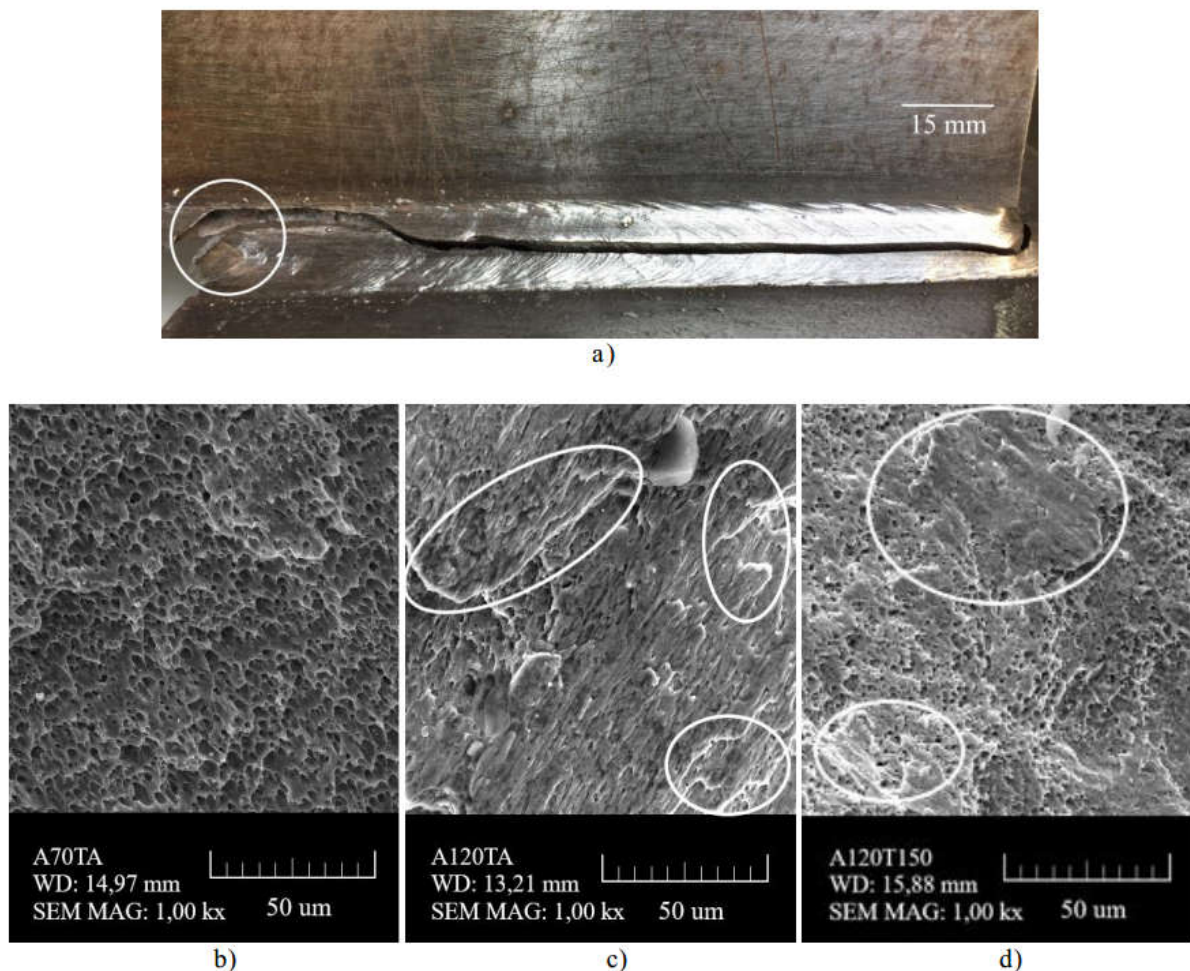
(a) Fractured weldment (A120TA) lateral view; (b-d) Fractures surfaces of different weldments (SEM - see text)
